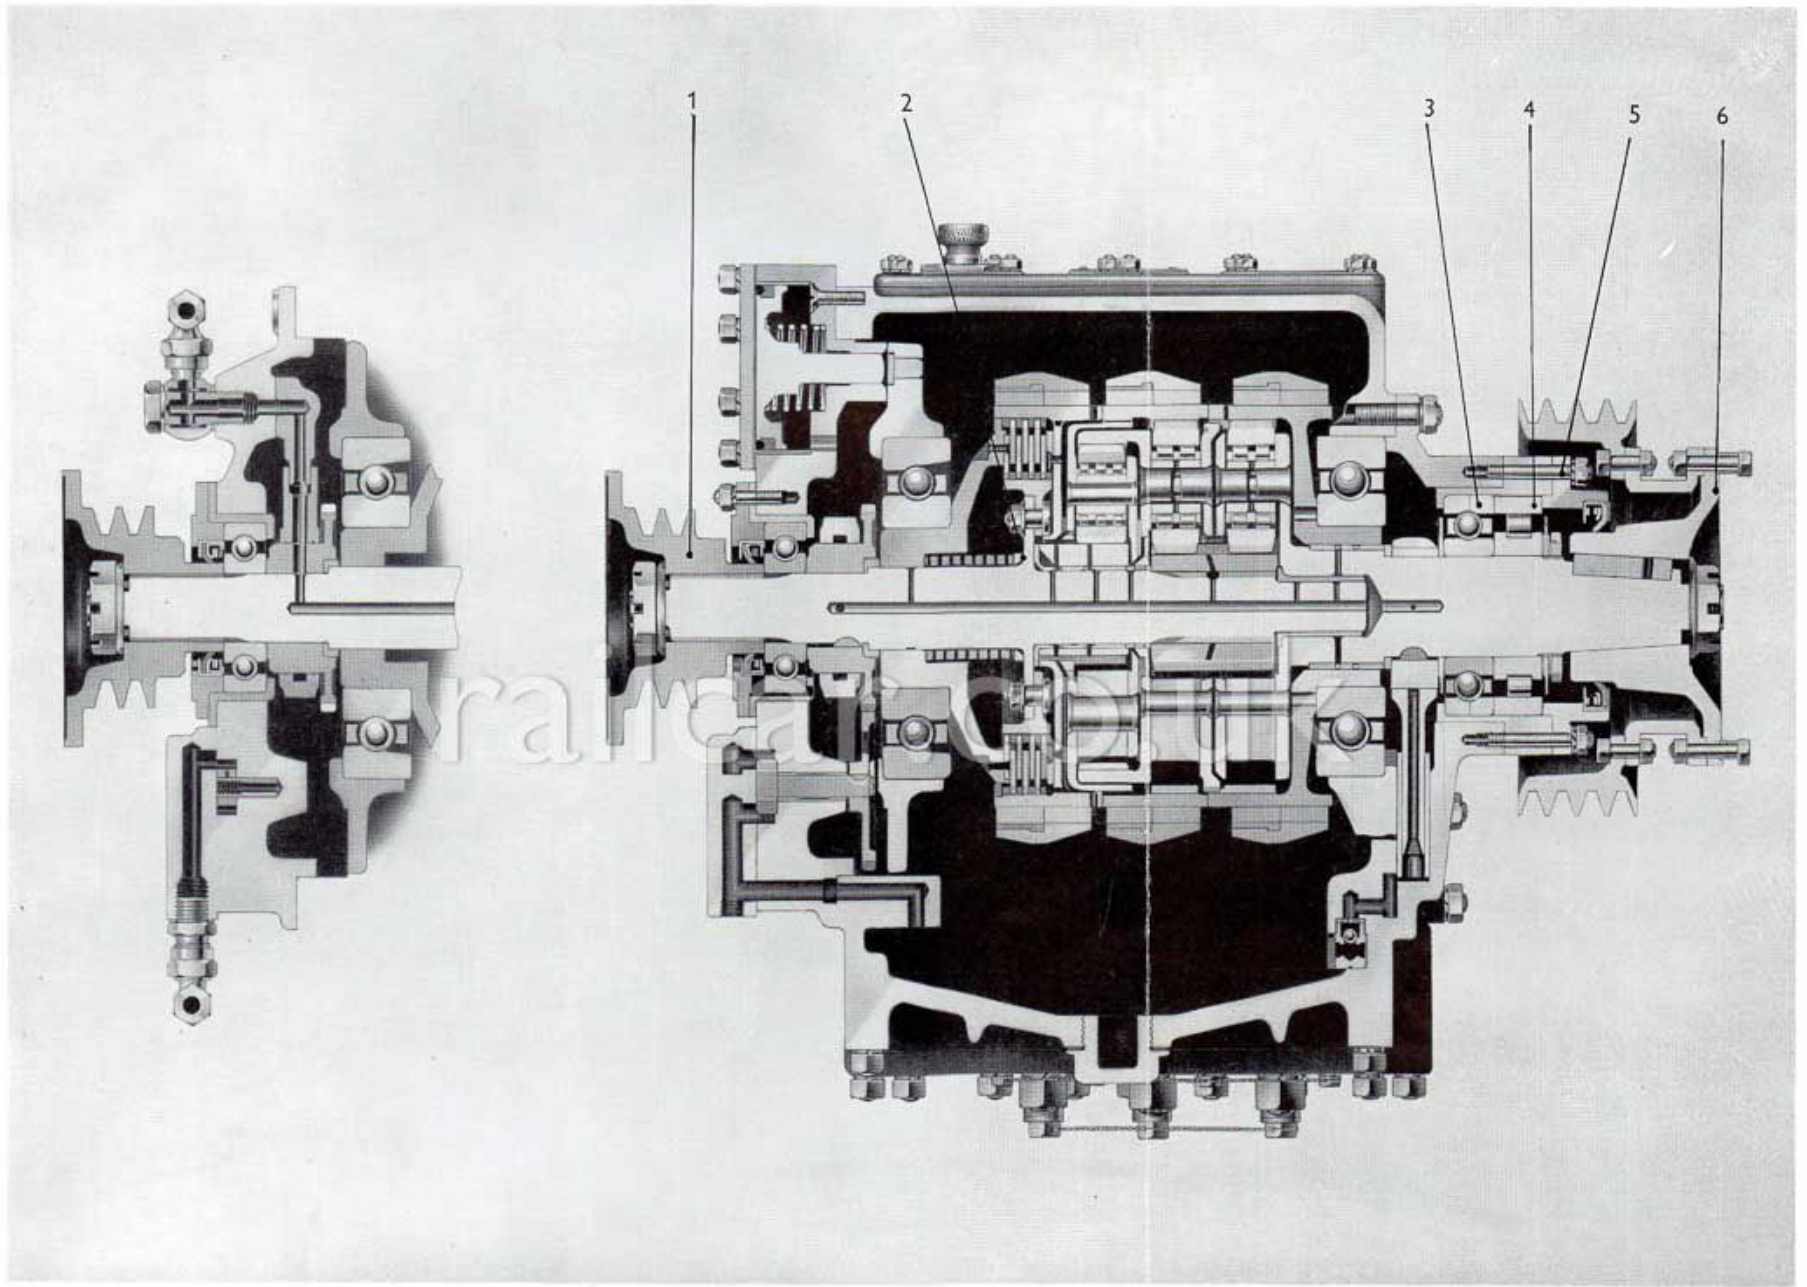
SECTION THROUGH GEARBOX. LIST No. 6230-6231.
